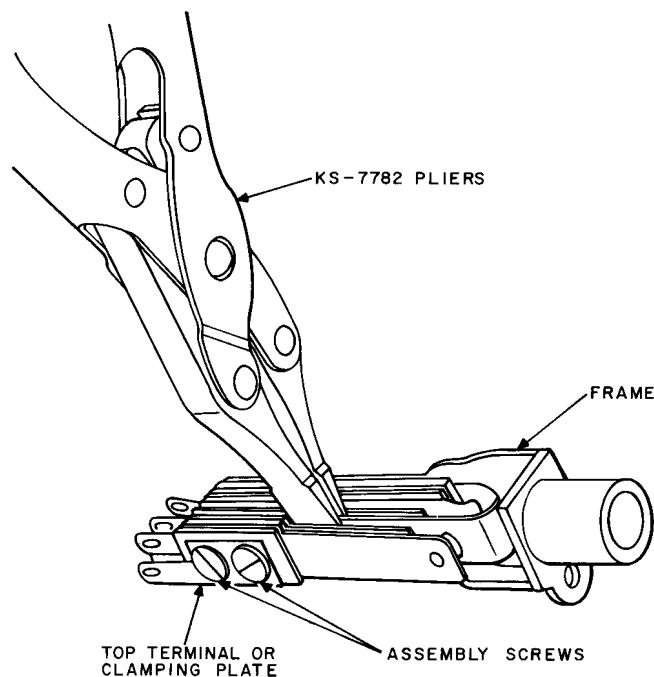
Method of Adjusting Spring Tension and Contact Pressure
